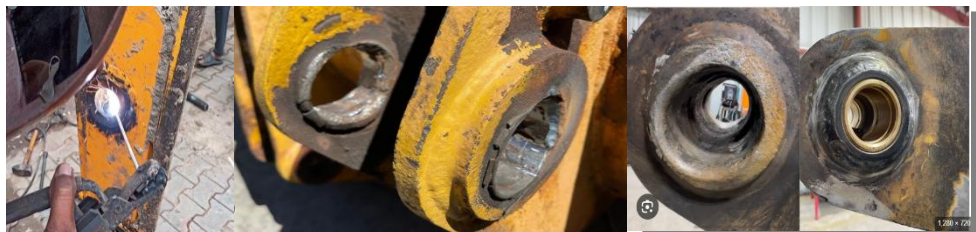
Wear And Damage Of JCB Boom Pin Hole
